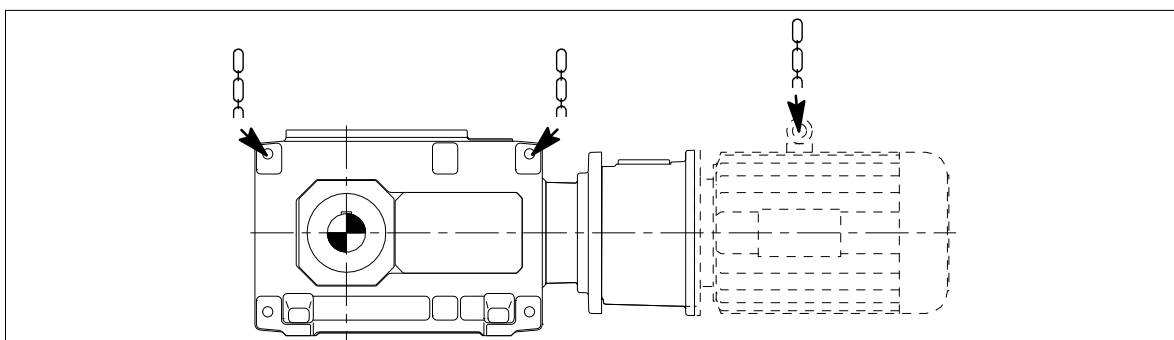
Attachment points on gear units with motor of types B4.. up to size 514 and B3.. of sizes 513 and 514
